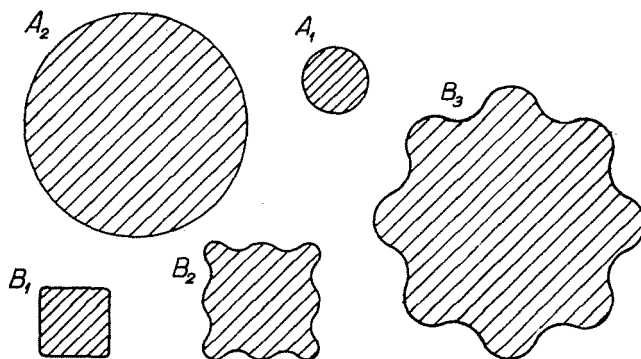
Shape and dimensions of sections of ingots used as starting material in Pilger tube mills. A) Circular-sectioned ingots of the old Mannesmann-Pilger process; B) Sections of ingots used in the new Elongating-Pilger process
